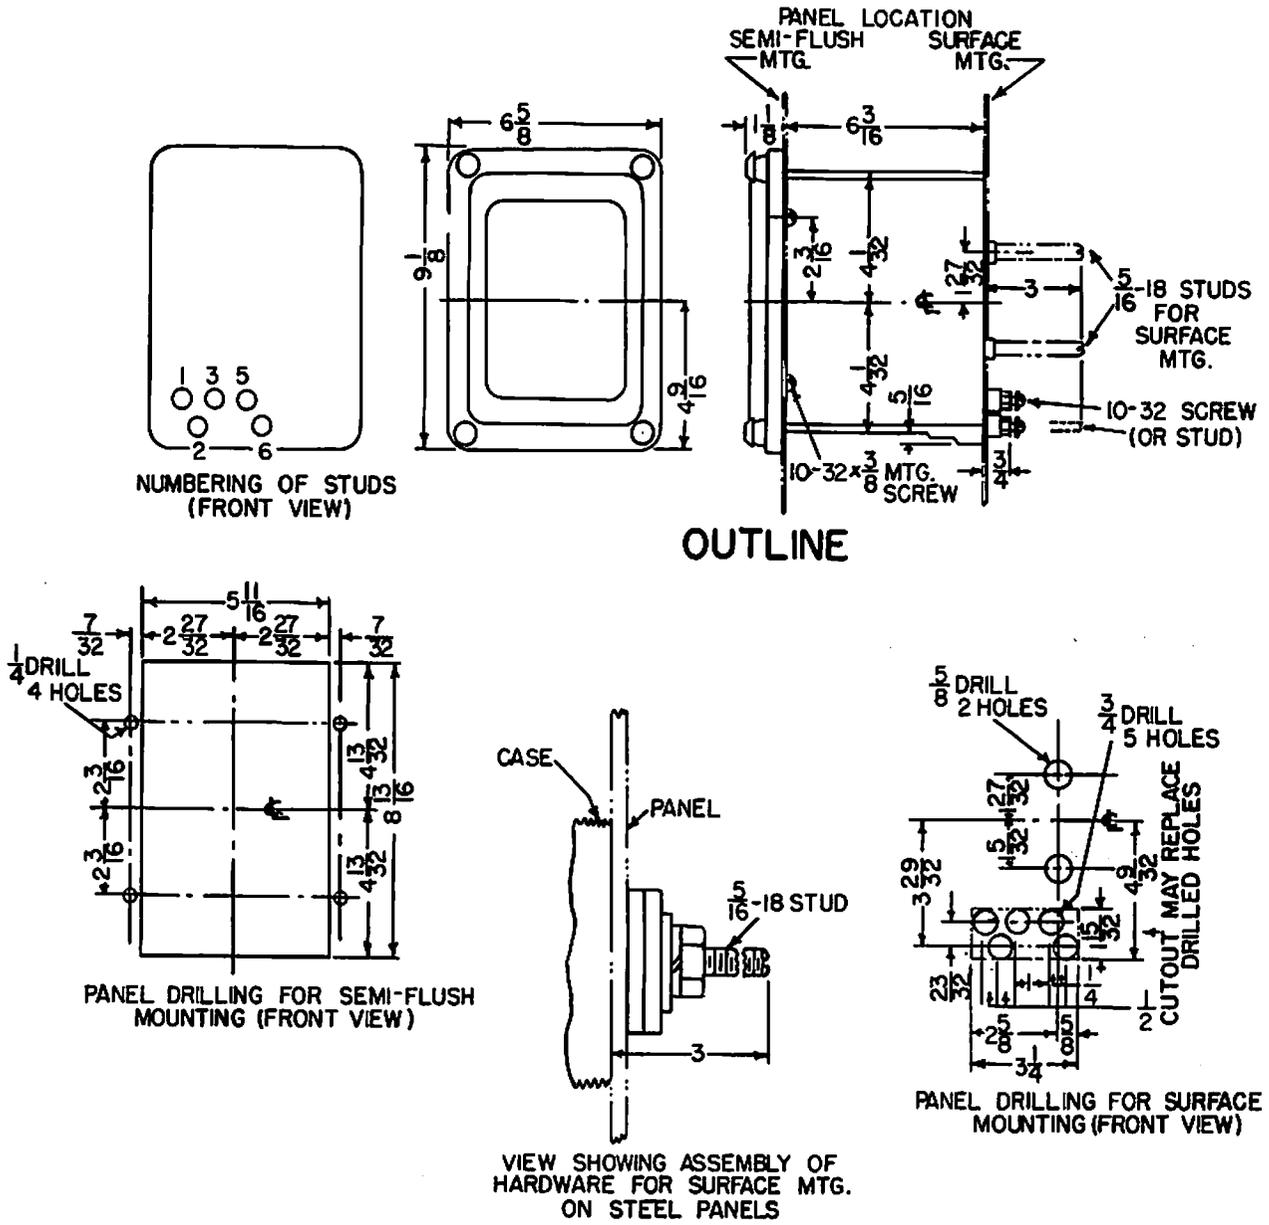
Outline and Panel Drilling Dimensions for Relay Types IAC53A, IAC53B, IAC53C and IAC54A
